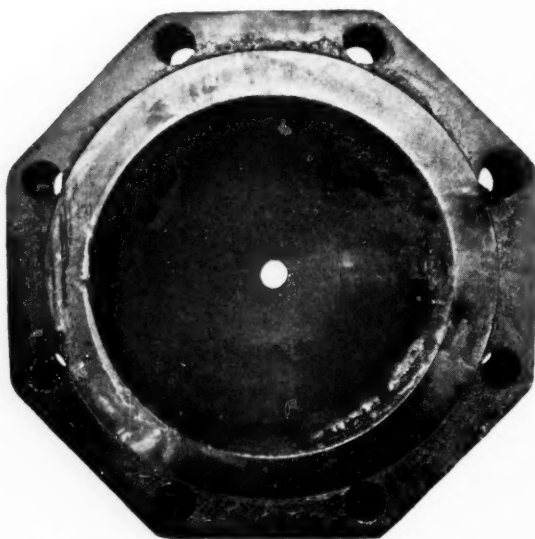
Showing the crank end view of the combustion chamber of an oil engine, and the extent to which carbon accumulations may develop if too heavy an oil fuel is used or break-down occurs in the lubricating oils.
